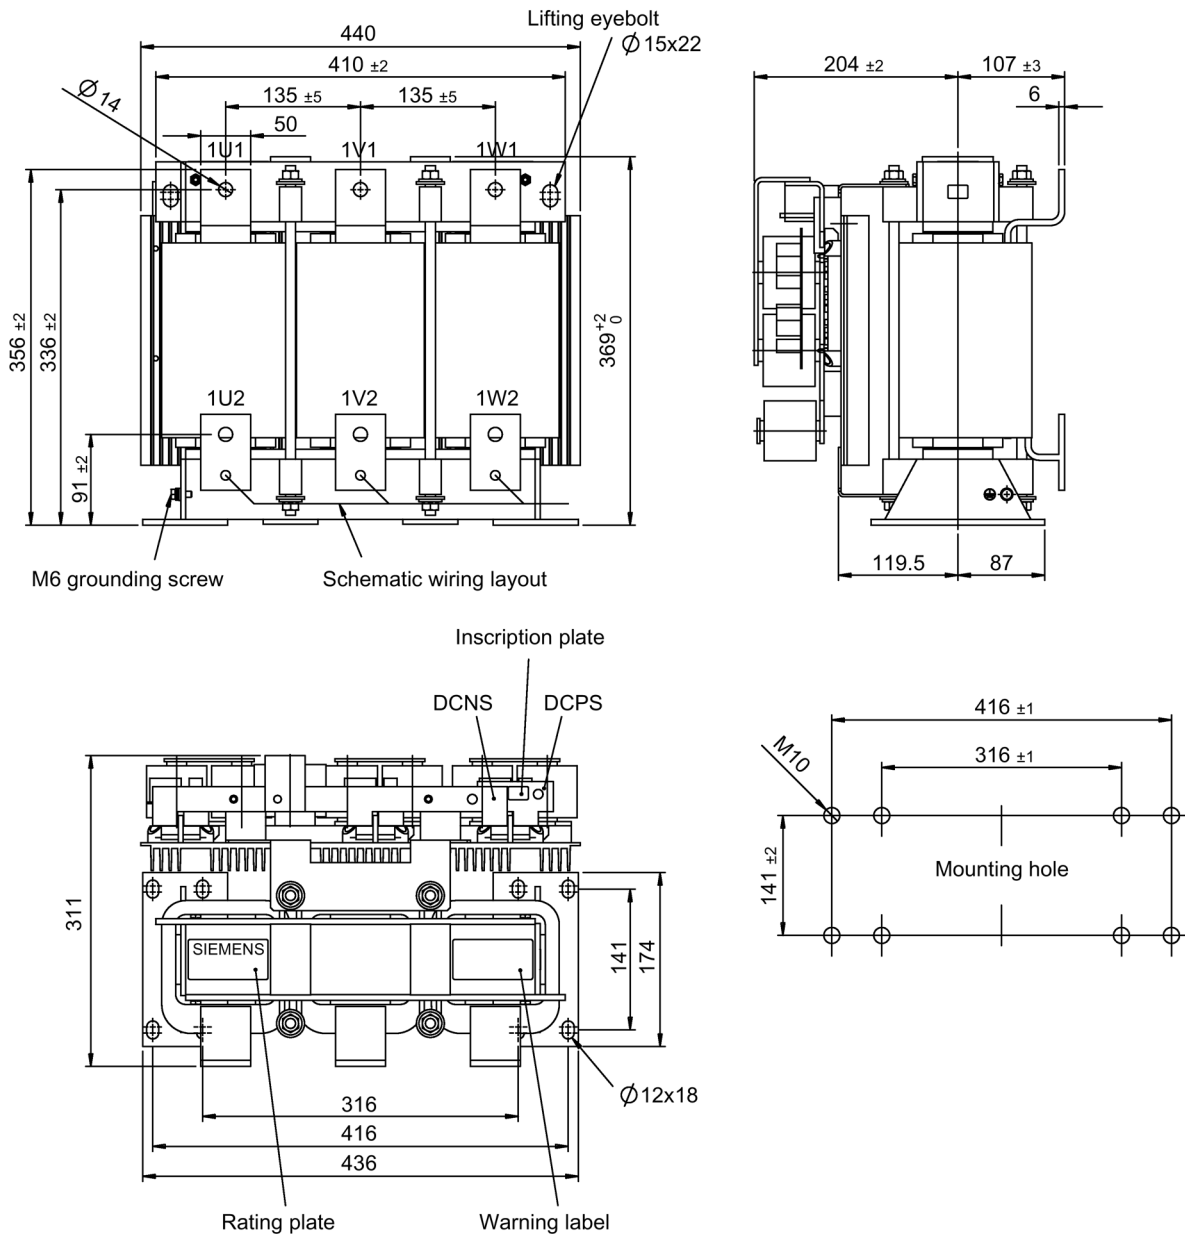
Dimension drawing for dv/dt filter compact plus voltage peak limiter, type 3
